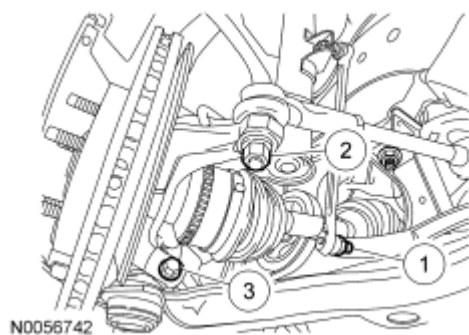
Identifying Stabilizer Bar Link, Retaining Nut And Knuckle Bolt
